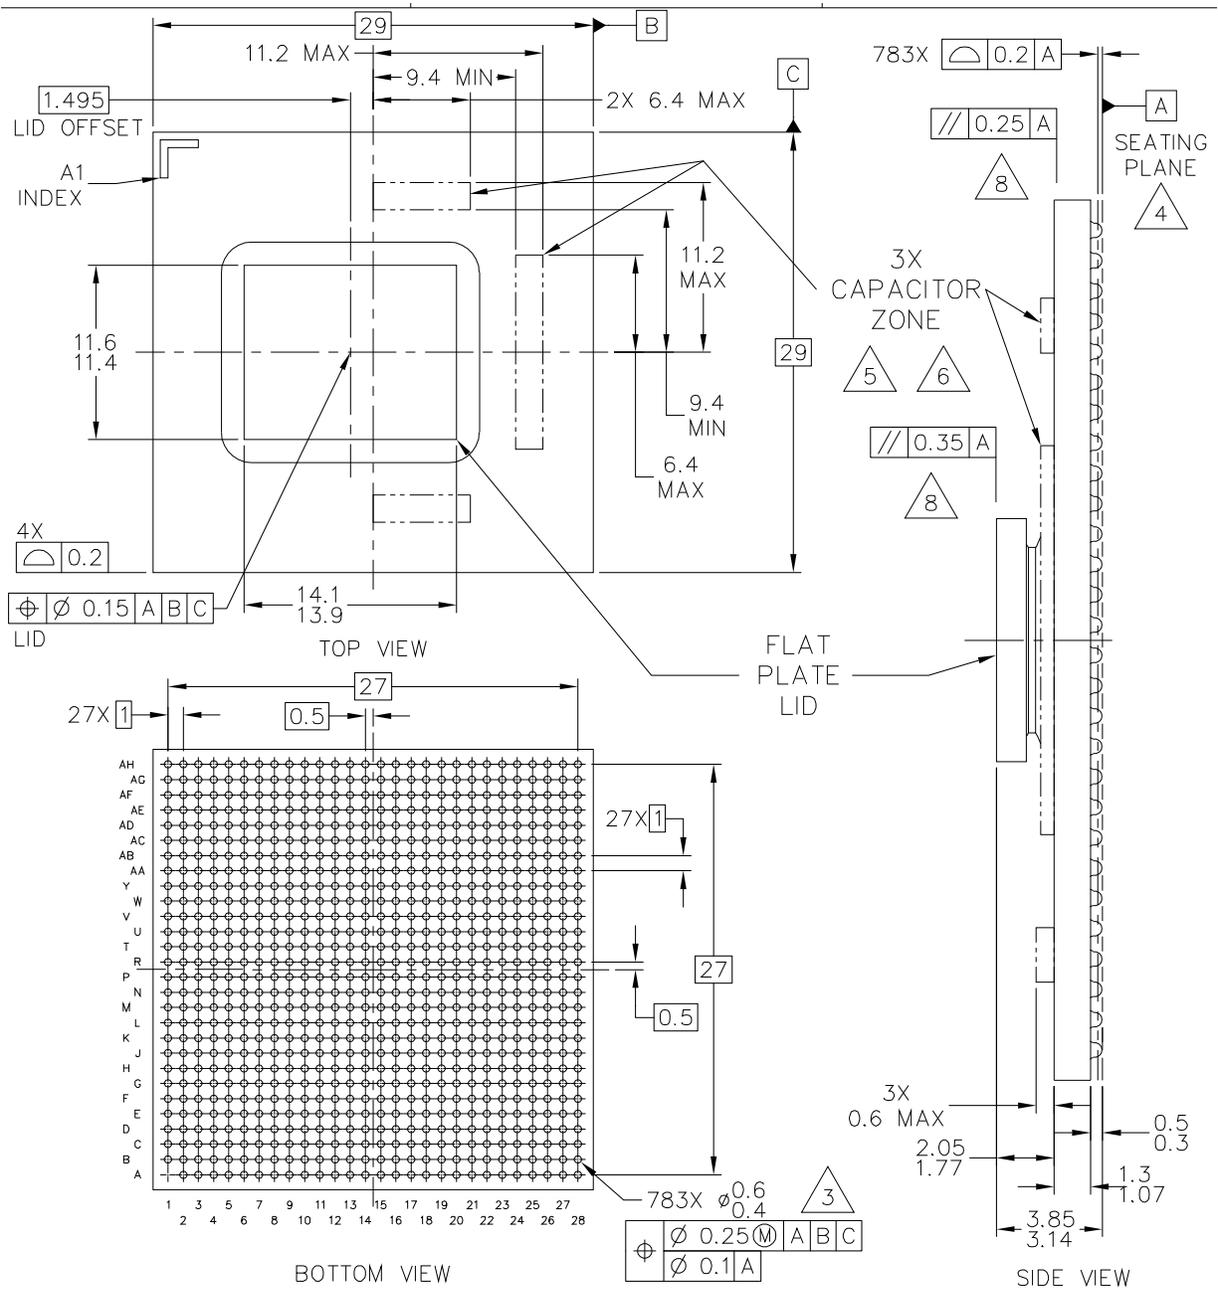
Mechanical Dimensions and Bottom Surface Nomenclature of the MPC8540 FC-PBGA
